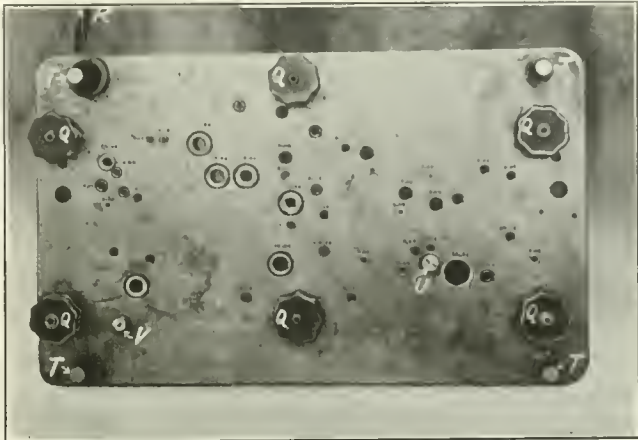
Master Jig for Right-hand Side Frame. The Holes in this Jig were located by the Master Plate shown in Fig. 8
